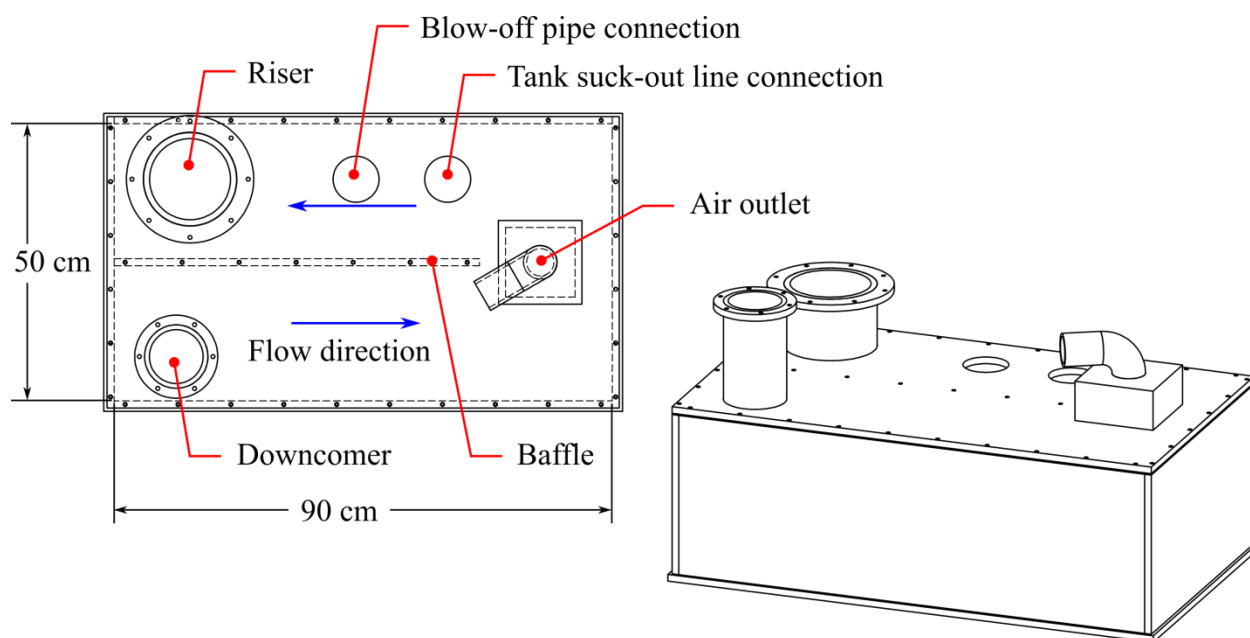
Baby HAC separator schematic from fabrication drawings. Tank bulkheads for the blow-off and tank suck-out and the air outlet valve assembly are not shown
